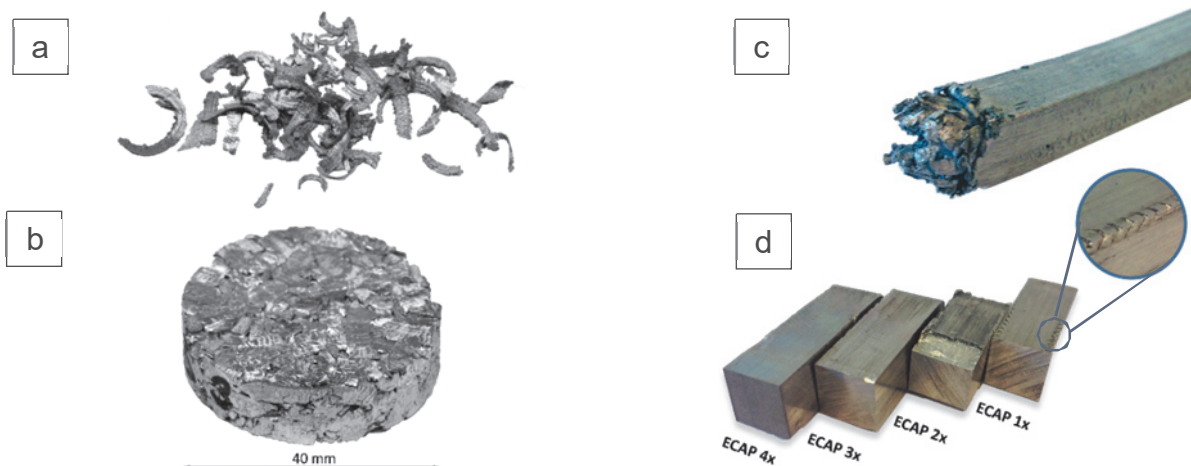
a) Macro view of chips after machining process; (b) cylindrical billet after cold compaction
